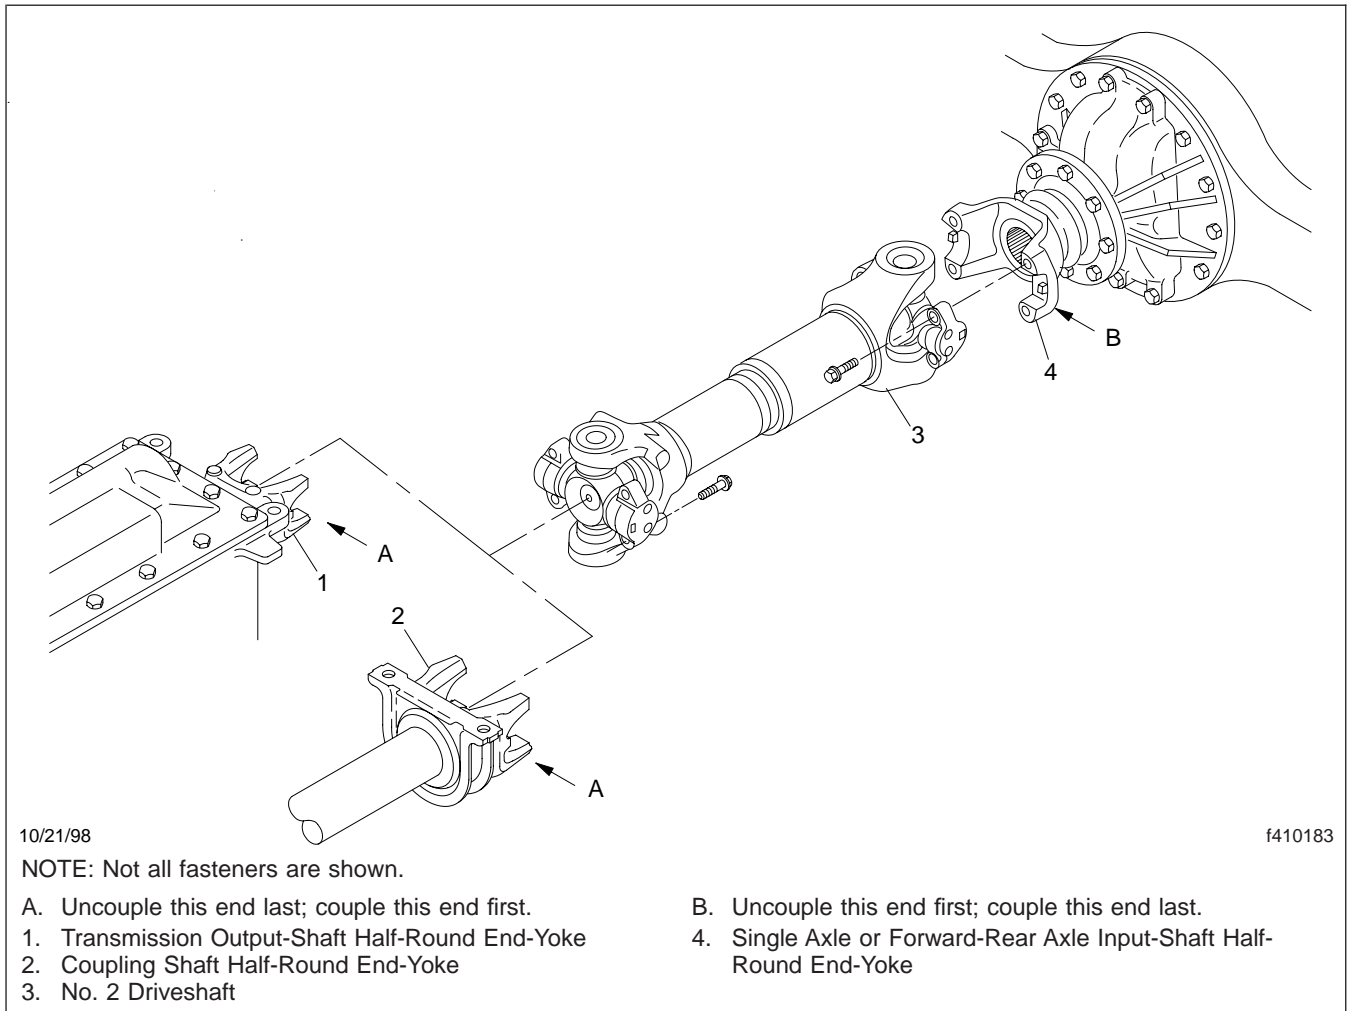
, Removal/Installation of a No. 2 Driveshaft With RPL U-Joints
